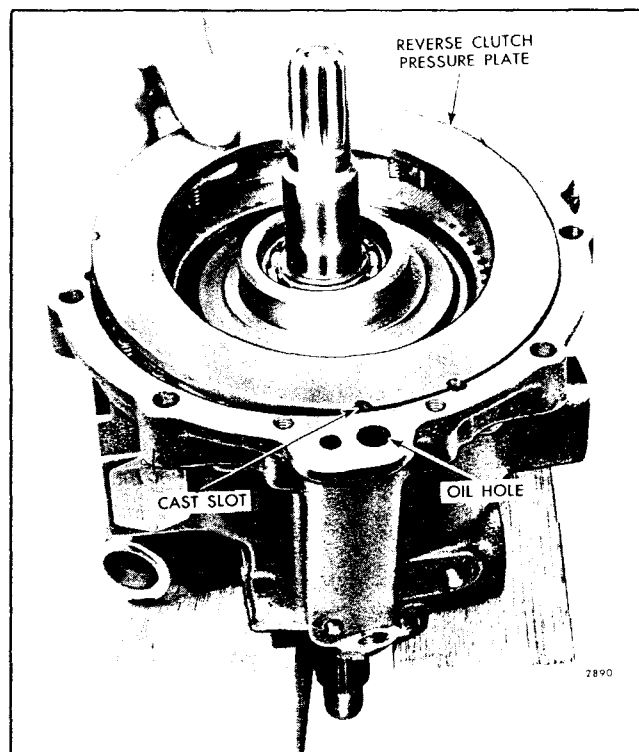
Installing Reverse Clutch Pressure Plate in Gear Housing
